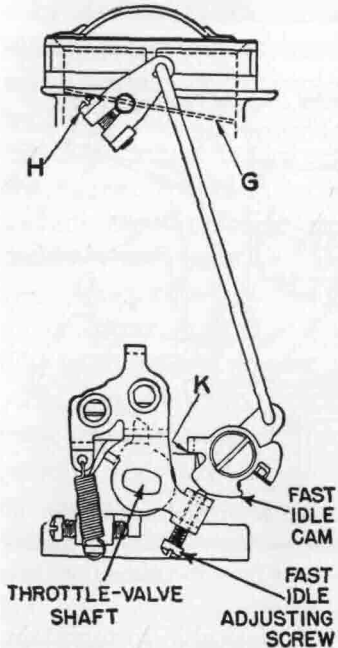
Linkage between choke valve *G*, fast-idle cam, and throttle. When the fast-idle cam is in position shown, fast-idle adjusting screw does not allow throttle to close completely. *H*, screw; *K*, clearance. (Buick Motor Division of General Motors Corporation)
